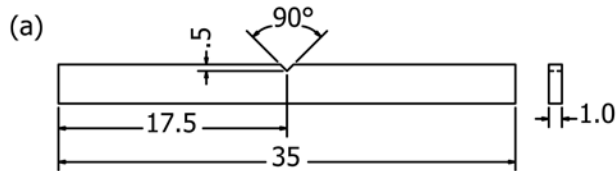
Geometry and dimension of the SENT specimen used in Paper D
